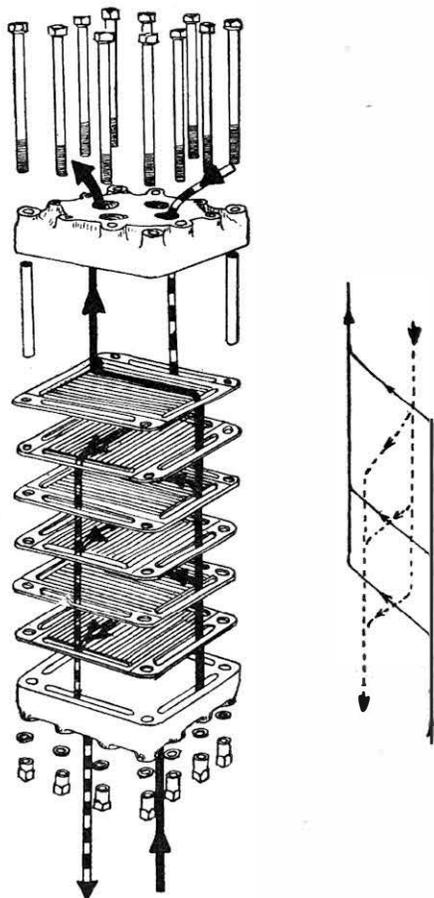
EXPLODED SKETCH OF HEAT-EXCHANGER.
